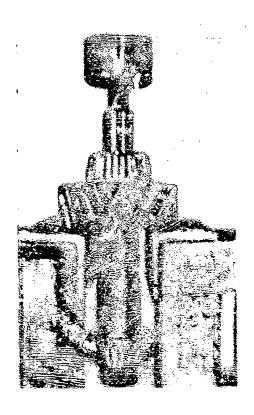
". Pressing the gear and rear bearing off the middle asia out-
